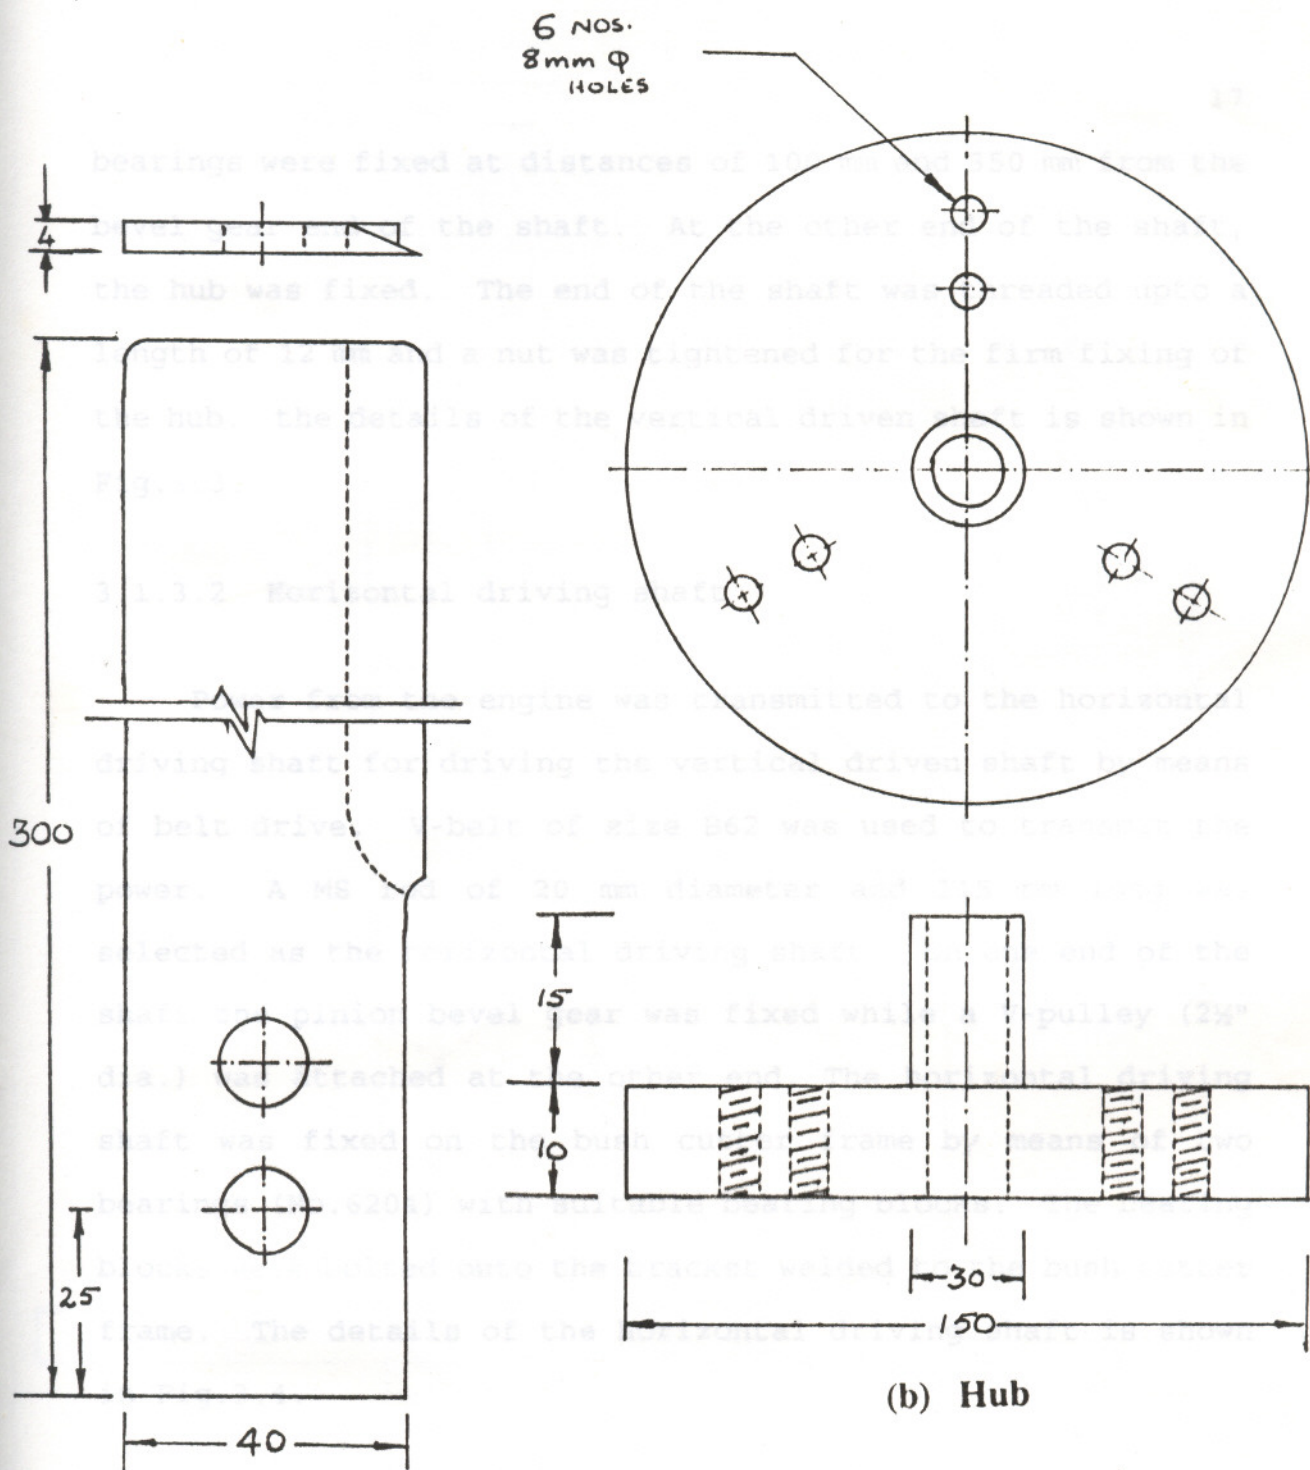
CUTTING UNIT OF THE BUSH CUTTER
